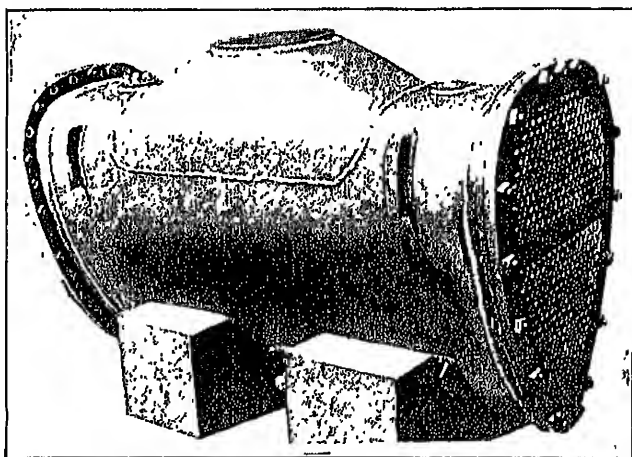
Welded Steel-Plate Condenser. No Rivets in Its Construction.
